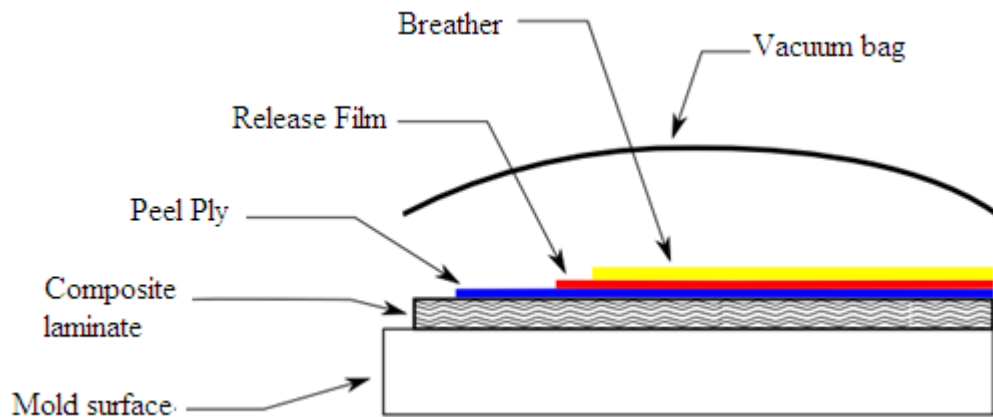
The lay-up assembly of different layers in the vacuum bag molding.
